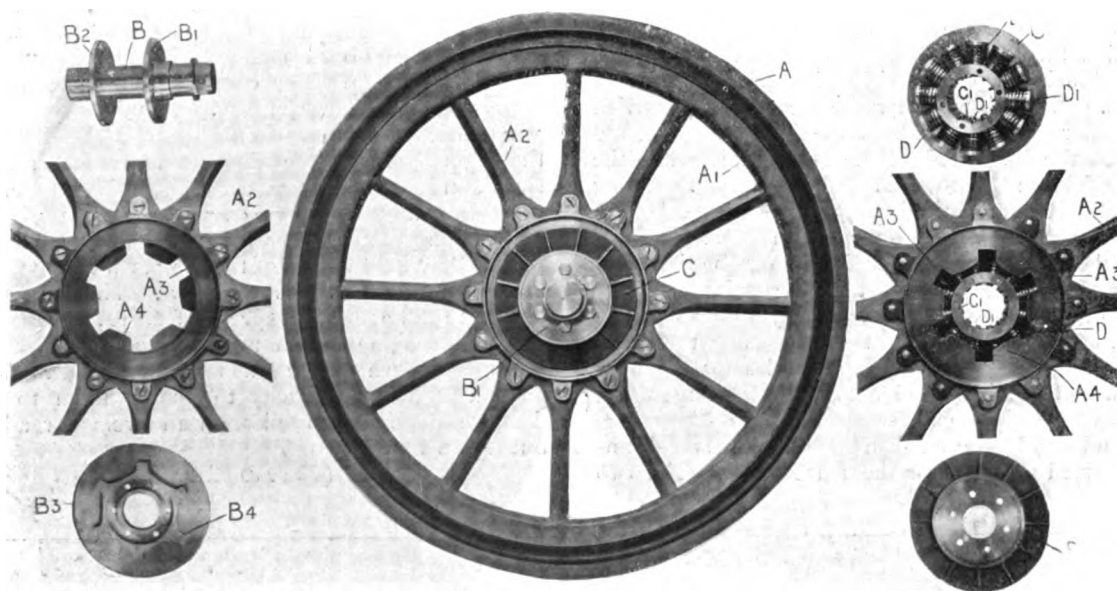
The Glyda Resilient Hub. View of the new type of wheel and its component parts. The complete wheel is shown in the centre, on the left is a view of the hub and two views showing the members of the jaw coupling now used in transmitting the drive, on the right are shown the springs and two reverse views of the driving members.
